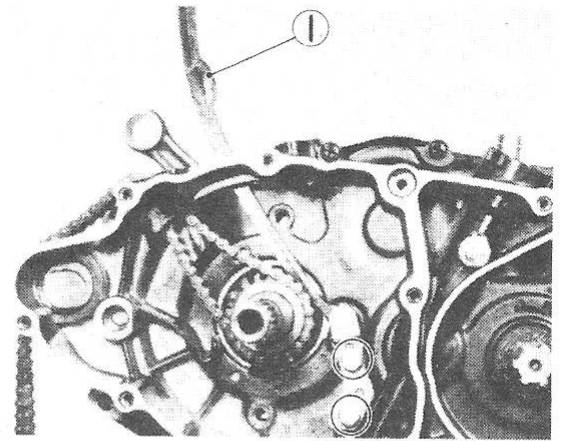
B.42 The camshaft chain tensioner (guide) (1) is attached to the case with two bolts (circled) (Sec 23)
